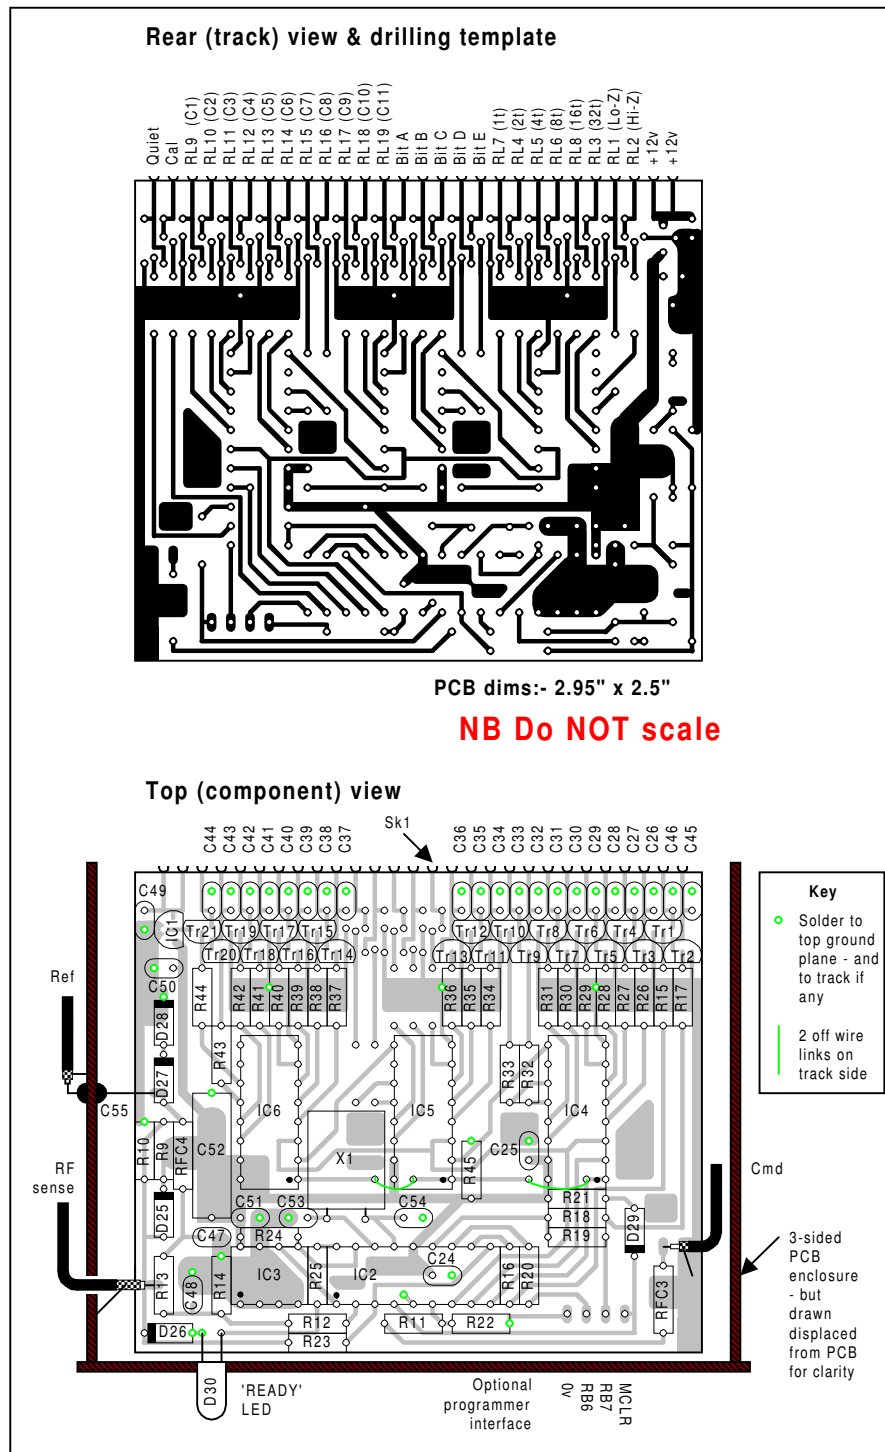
Logic board PCB. This is a double-sided PCB with the component side of the board completely unetched, providing shielding and ground connections. Note four through board links adjacent to R40, R36, R28 and pin 5 of IC2 - which bring ground through to the track side of the board. The PCB is shown etched for the optional bit outputs - but illustrated unpopulated.
